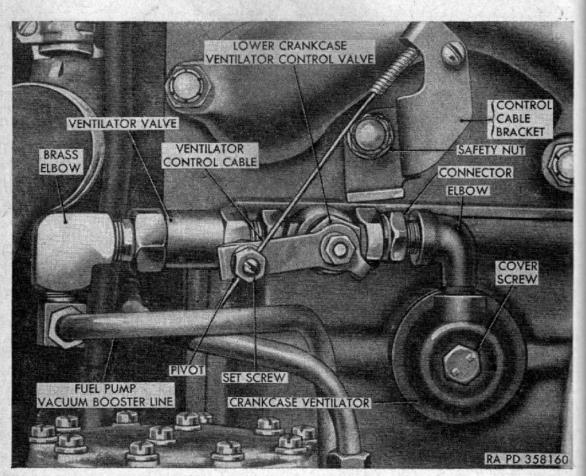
Lower crankcase ventilator control valve and crankcase ventilator installed.
